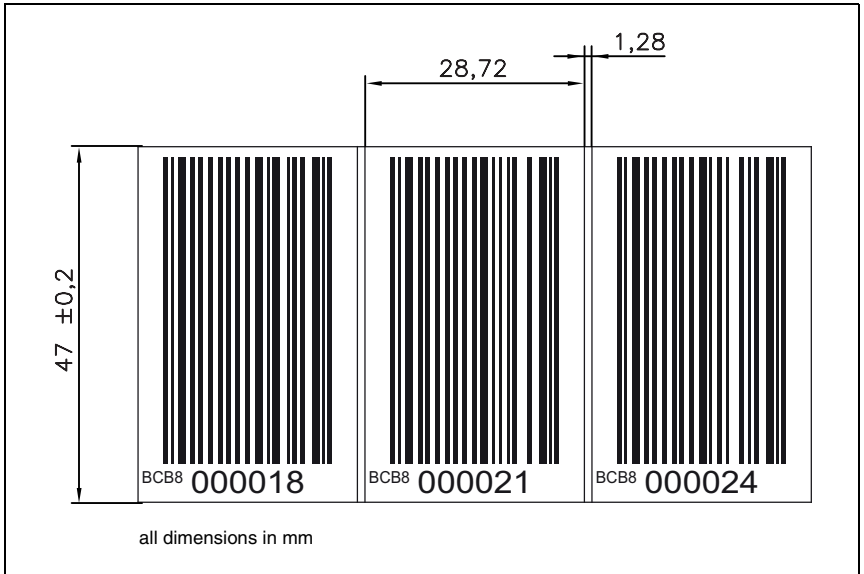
Dimensioned drawing for position, control and marker bar codes in a 30 mm grid
